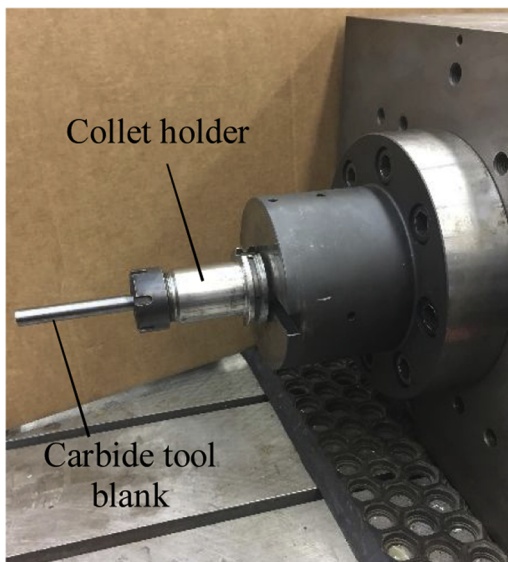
Photograph of tool-holder clamped in the spindle test stand.
